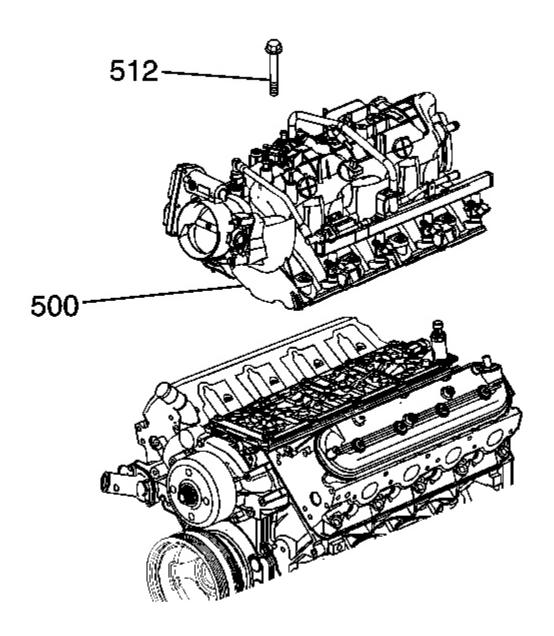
Intake Manifold Courtesy of GENERAL MOTORS CORP.
